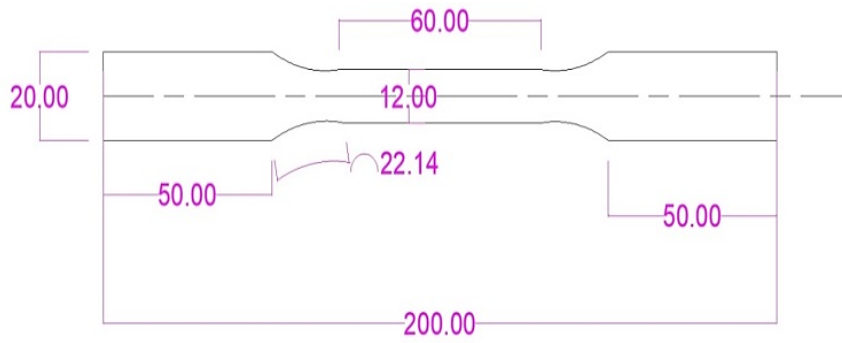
Dimensions of the tensile test specimen (thickness = 3 mm). According to ASTM.
